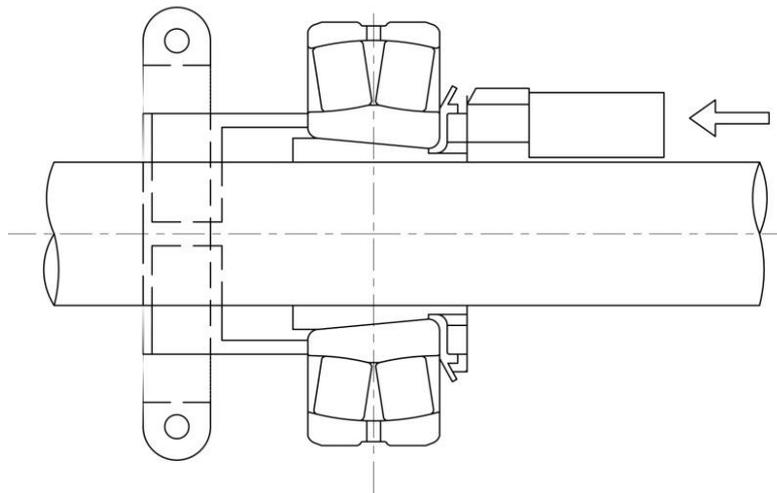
Removal of Adapter with Stop and Axial Pressure
